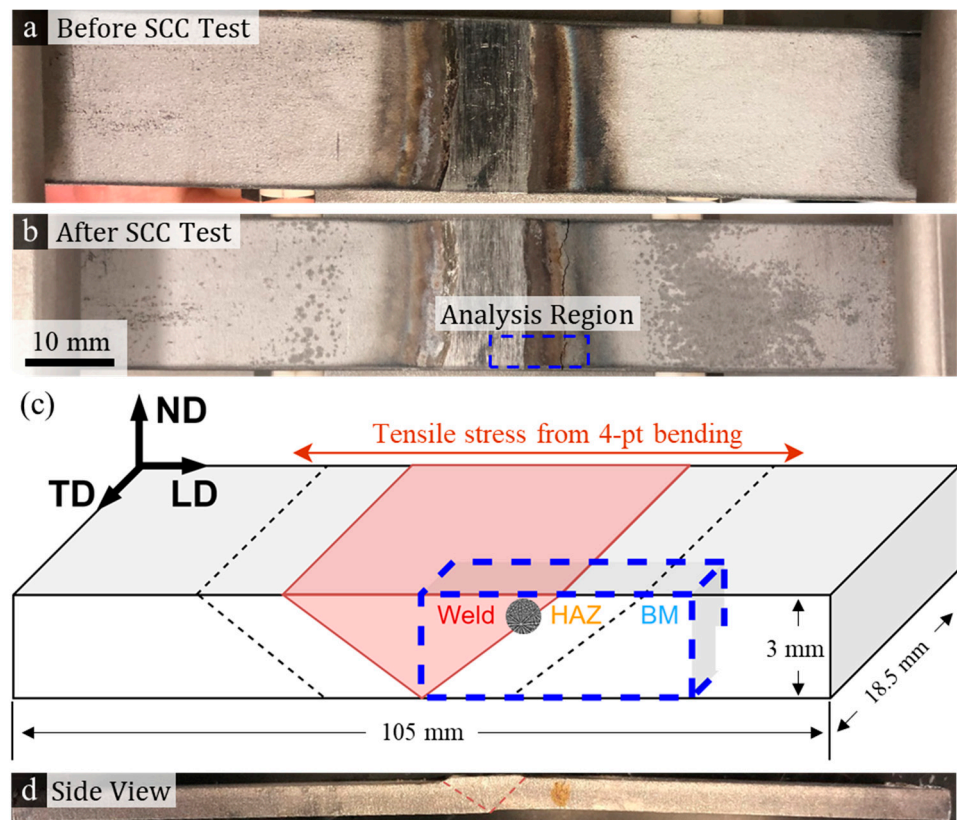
(a,b) Surface morphology of test coupon before and after immersion in boiling magnesium chloride; (c) schematic illustration of the coupon dimension and welding zones; (d) side view of the test coupon after boiling magnesium chloride immersion, with a major crack appearing to the right of the weld seam (adapted from Reference [27]).
